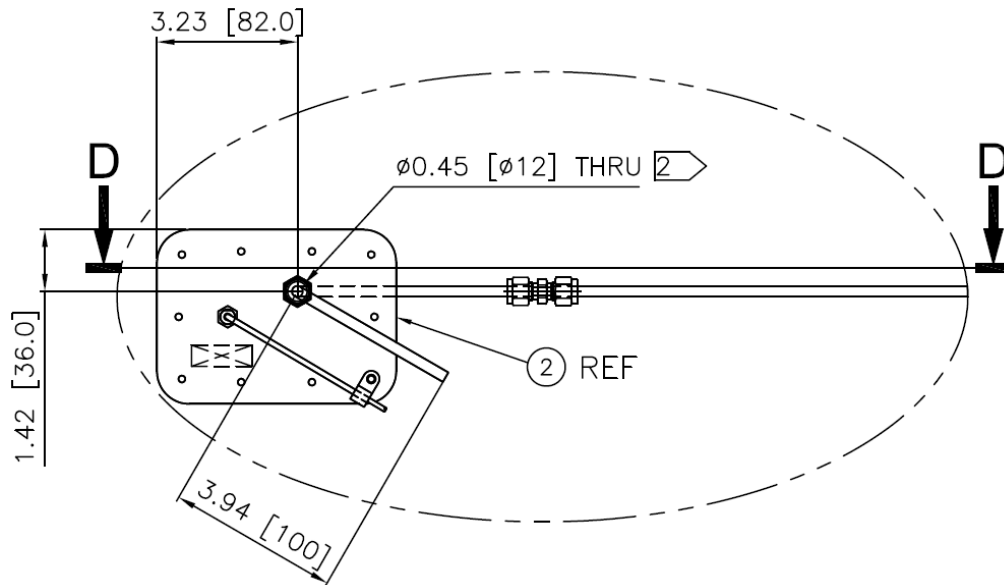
Schematic drawing of the inlet plate on the Bulldog.
